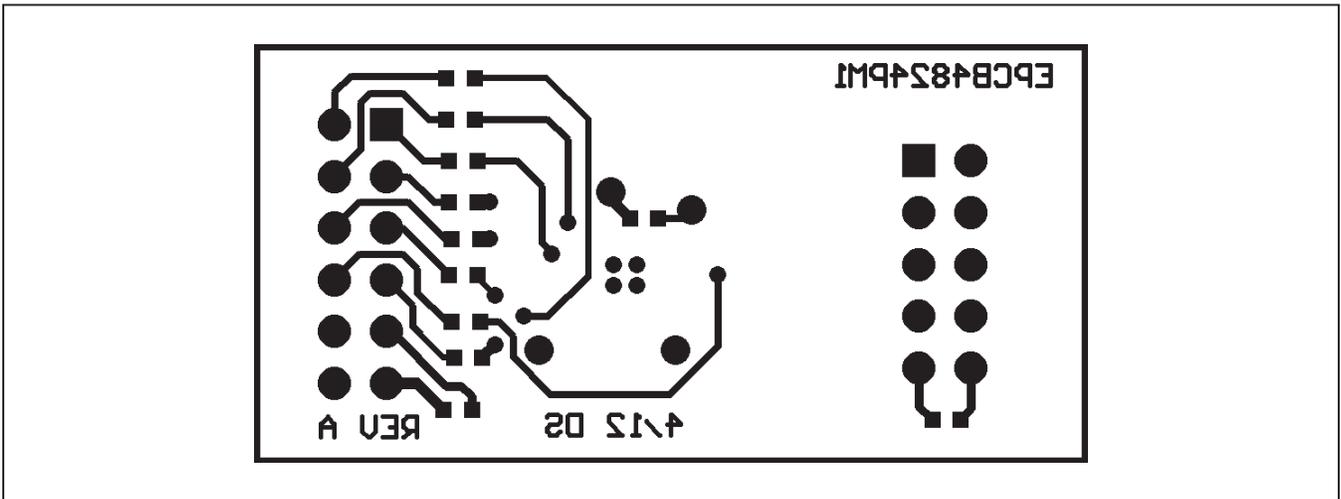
MAX4824PMB1 Peripheral Module PCB Layout—Solder Side
